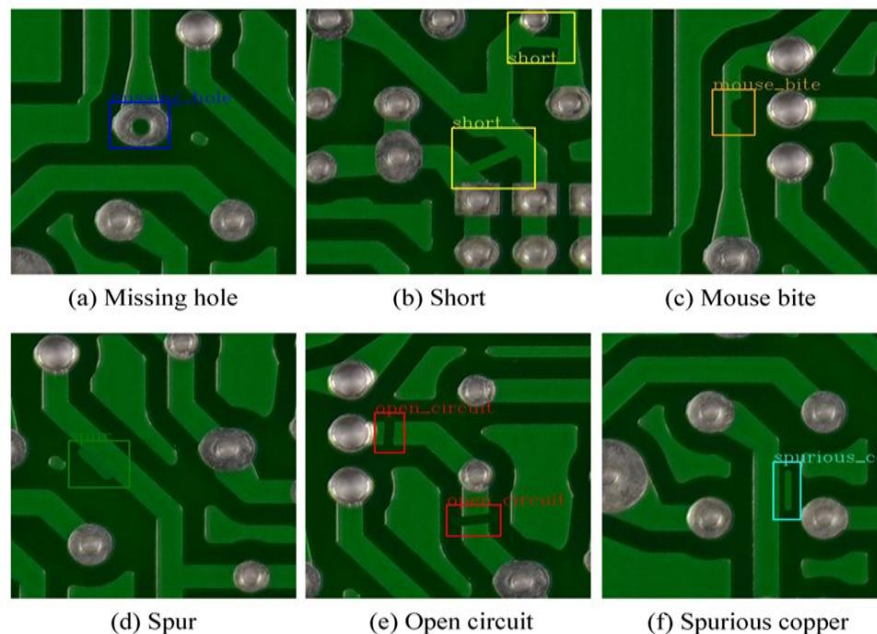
Examples of common PCB defects on a green PCB substrate (from the open PCB Defect Dataset). Highlighted regions indicate: (a) Missing hole (blue box) – an un-drilled via that should exist; (b) Short (yellow boxes) – unintended copper connection between traces; (c) Mouse bite (orange box) – a notch in a trace; (d) Spur (green box) – an extra copper protrusion; (e) Open circuit (red boxes) – breaks in a circuit trace; (f) Spurious copper (cyan box) – unwanted copper fragment. These defects can lead to functional failures and thus must be detected and removed [9]
